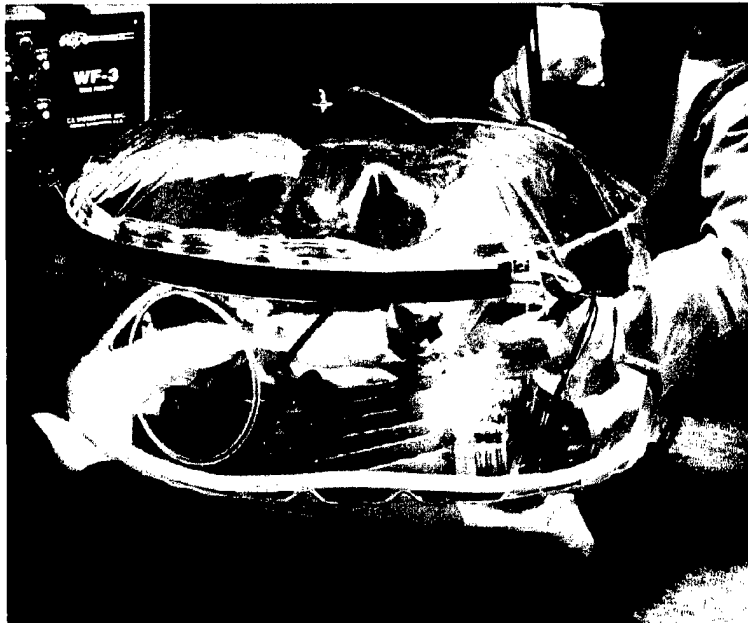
Collapsible plastic chamber for shipboard welding.
